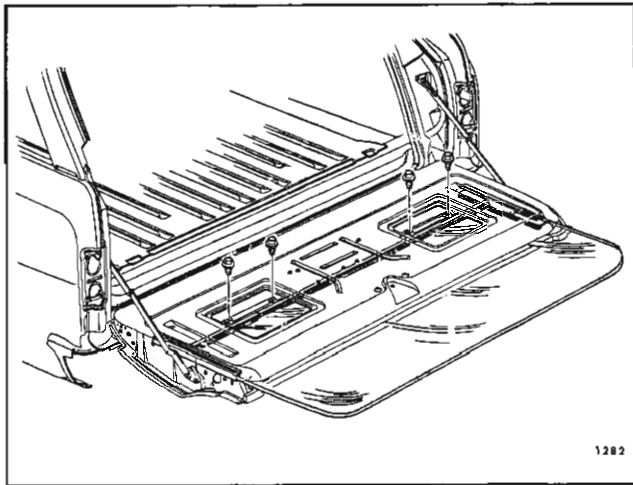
F20—Tail Gate Inner Panel Cams Attachment
